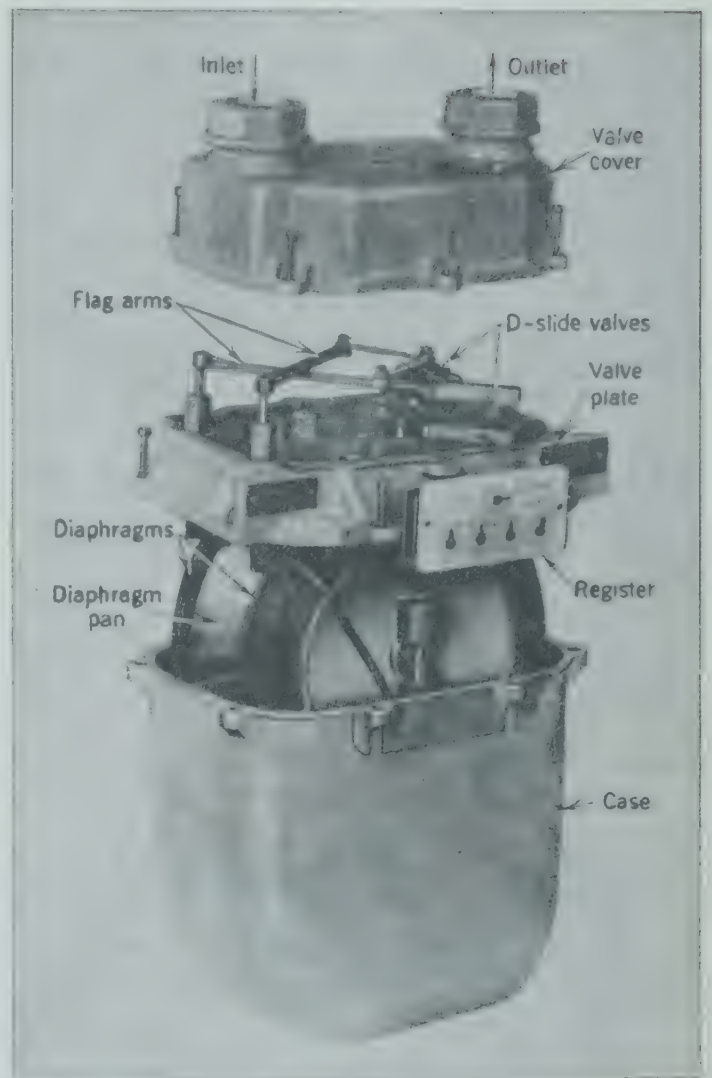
Exploded view of diaphragm gas meter. (Pittsburgh Equitable Meter Division of Rockwell Mfg. Co.)
